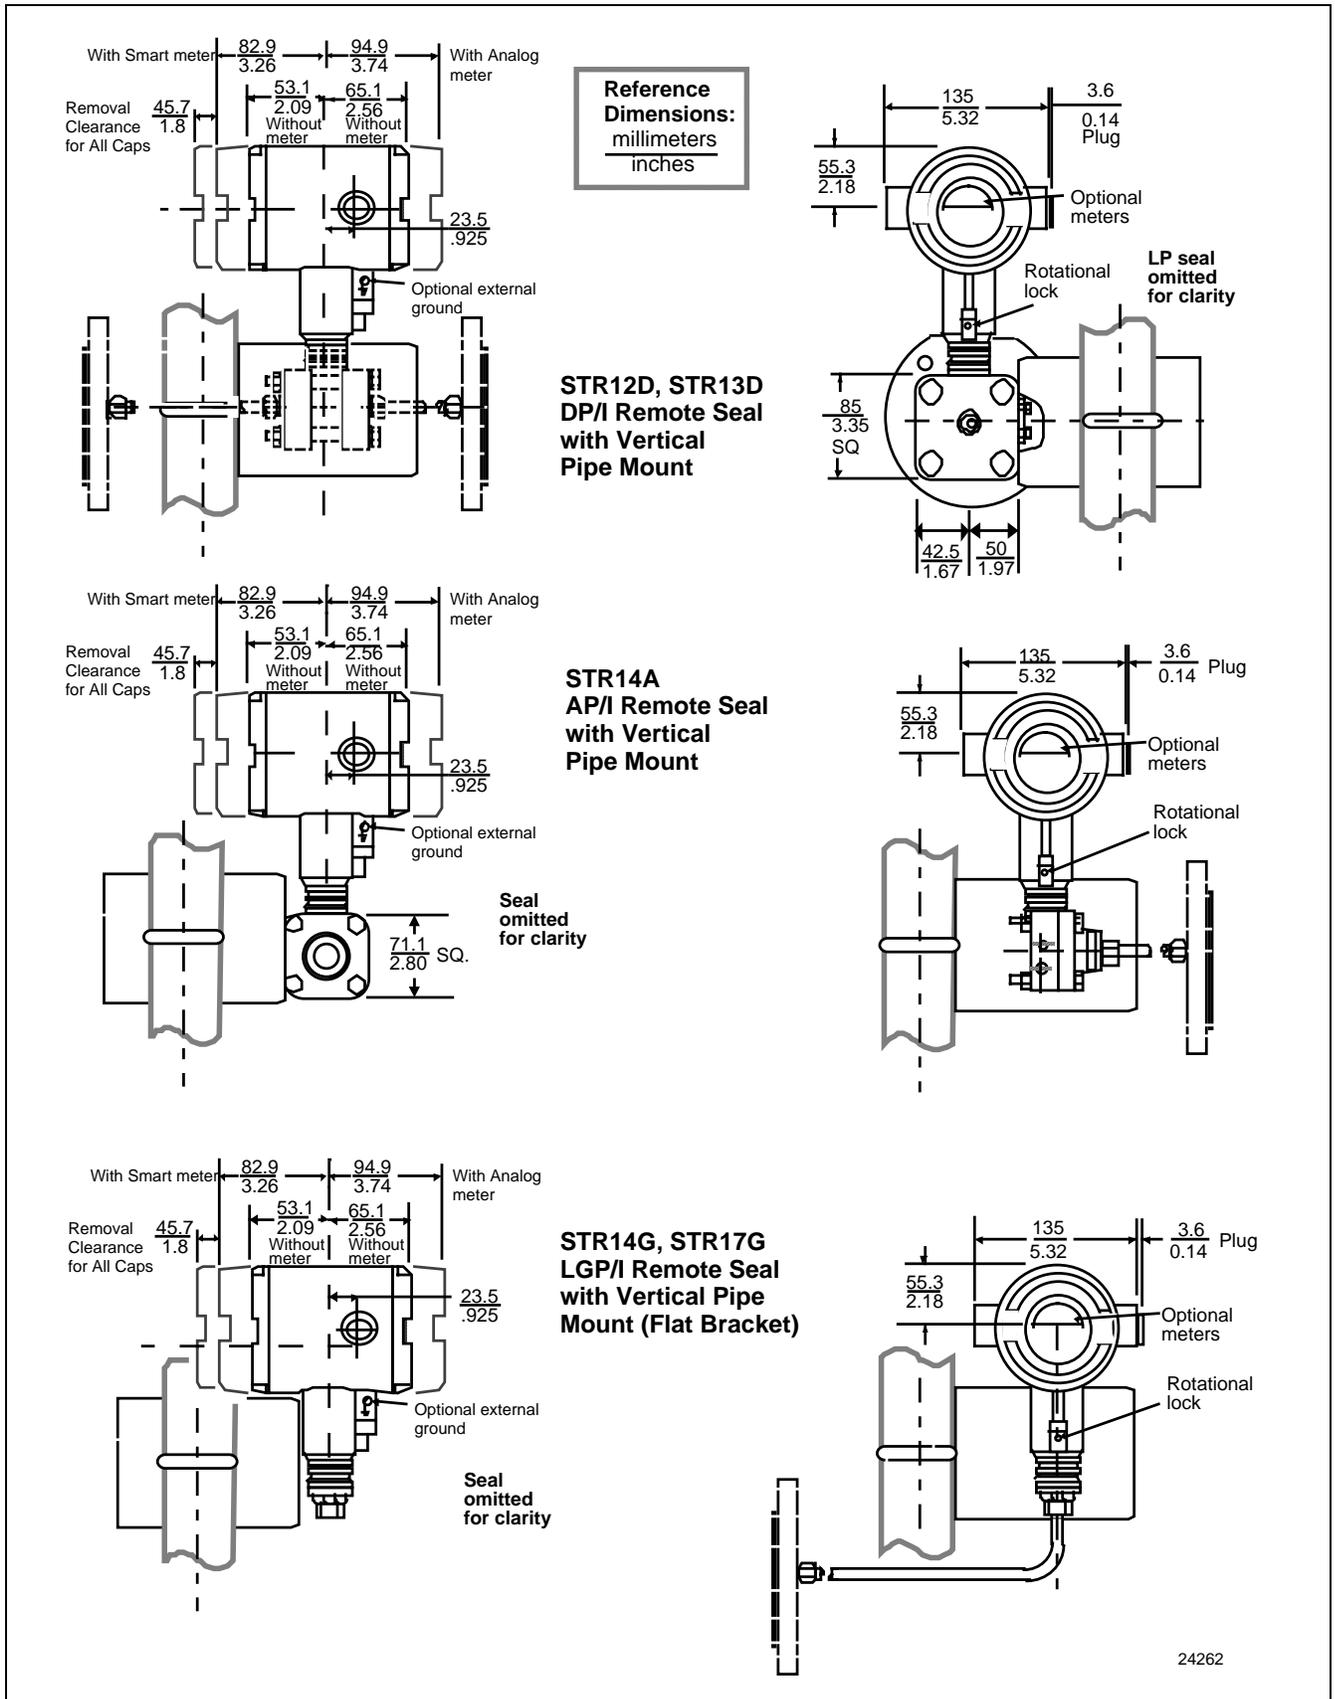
Approximate vertical mounting dimensions for Remote Seal Transmitter.
